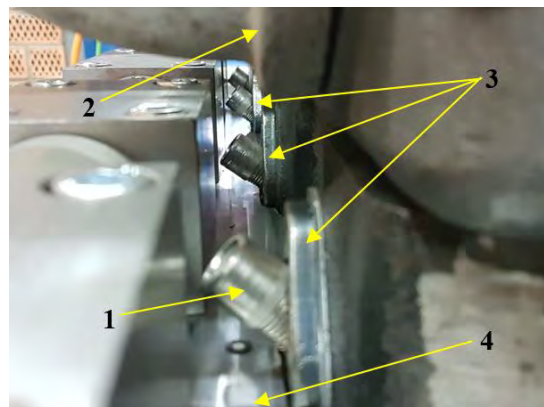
Modified coolant outlet from the cylinder block (view along the axis of the engine shaft): 1 – outlet pipes; 2 – engine intake manifold; 3 – flanges; 4 – support plate
